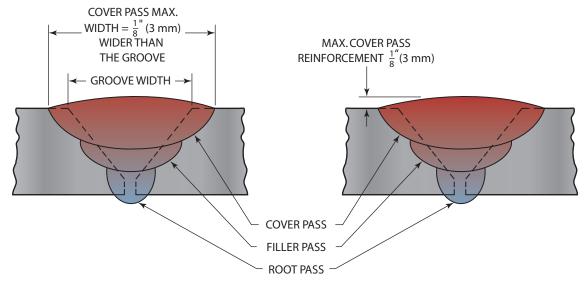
Excessively wide or built-up welds restrict pipe expansion at the joint, which may cause premature failure. Check the appropriate code or standard for exact specifications.
